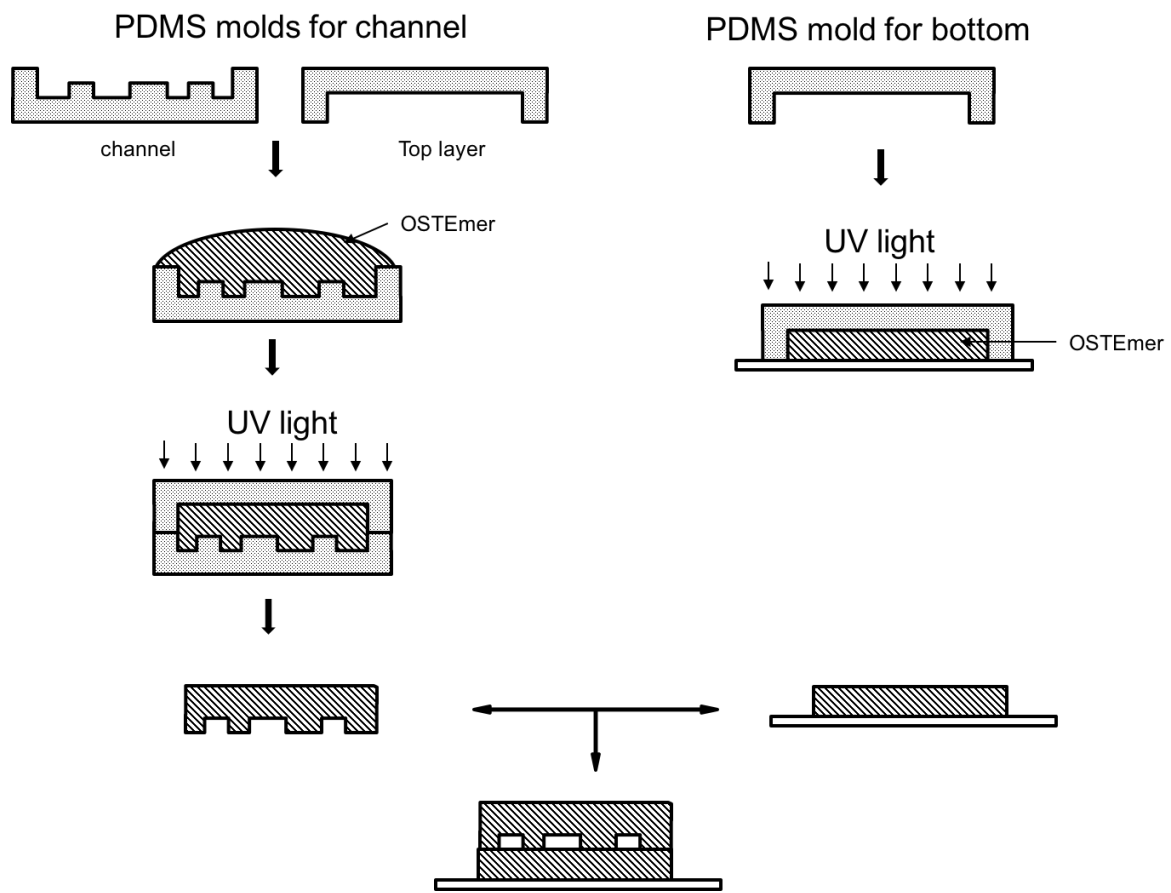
Process to fabricate OSTEmer microfluidic chip using "quasi injection molding" technique
